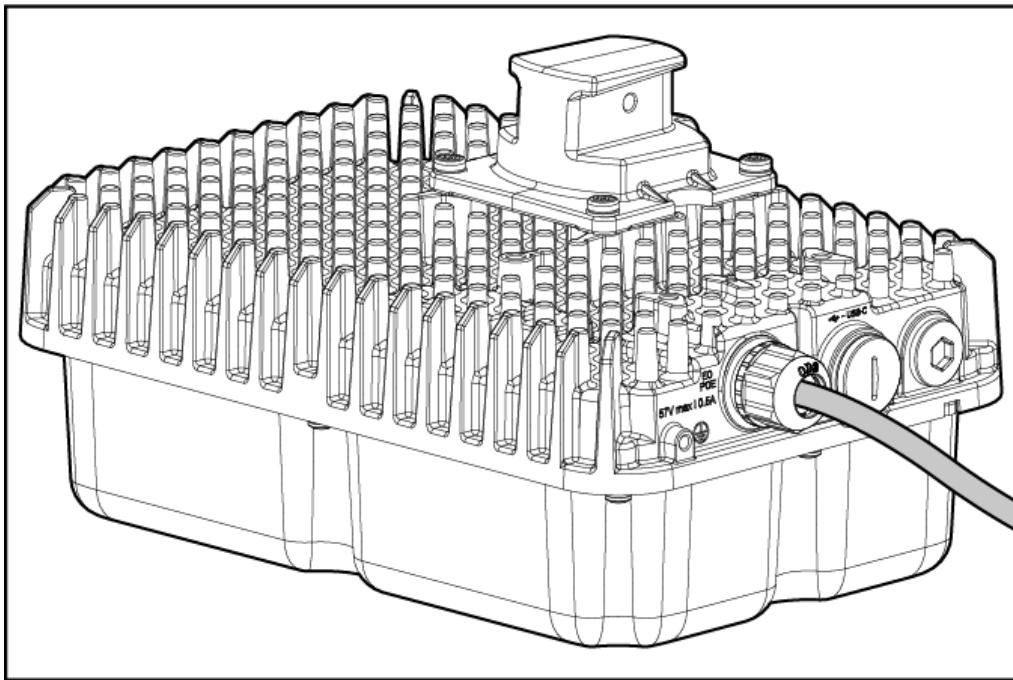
Ethernet Cable and M20 Cable Gland Assembly
